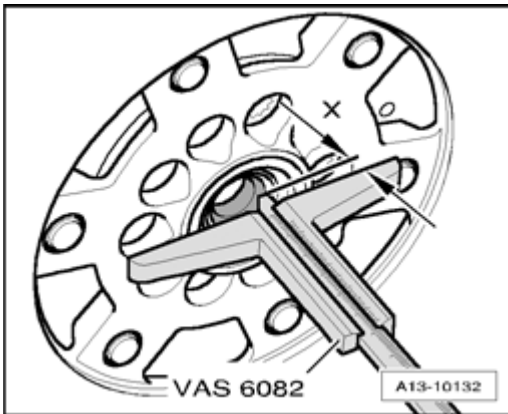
Measuring Depth That Needle Bearing Is Driven Into Dual-Mass Flywheel
